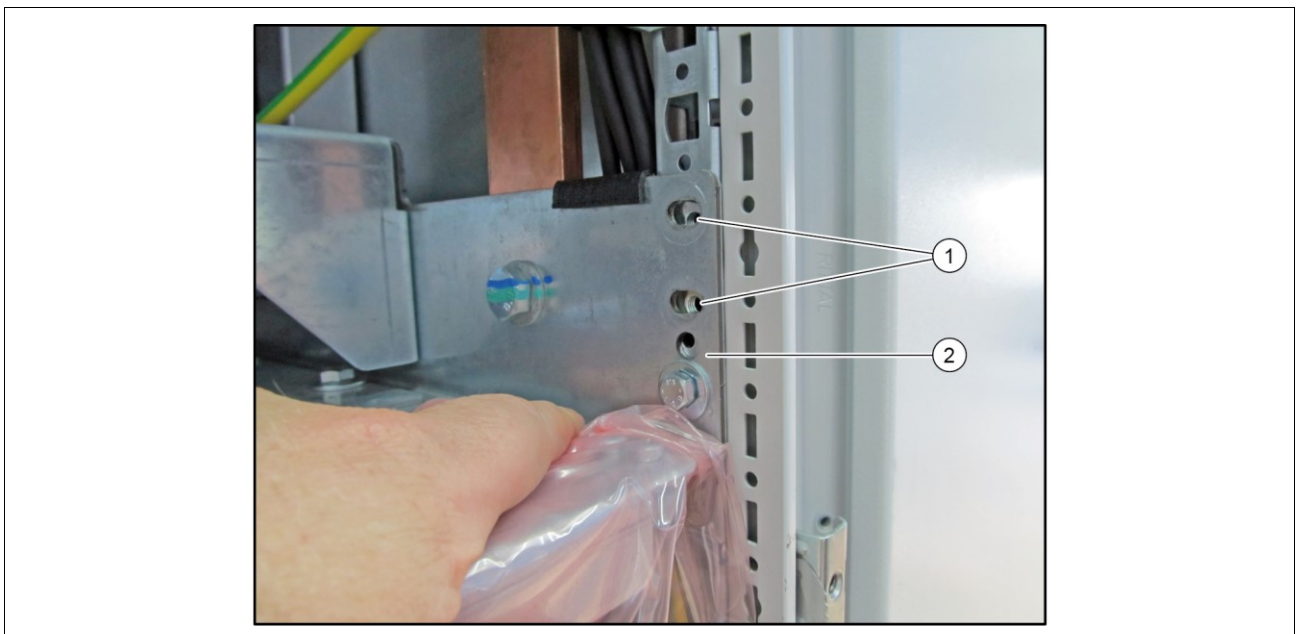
Screws for fixing the disassembling rails (here as an example for the dv/dt choke)
